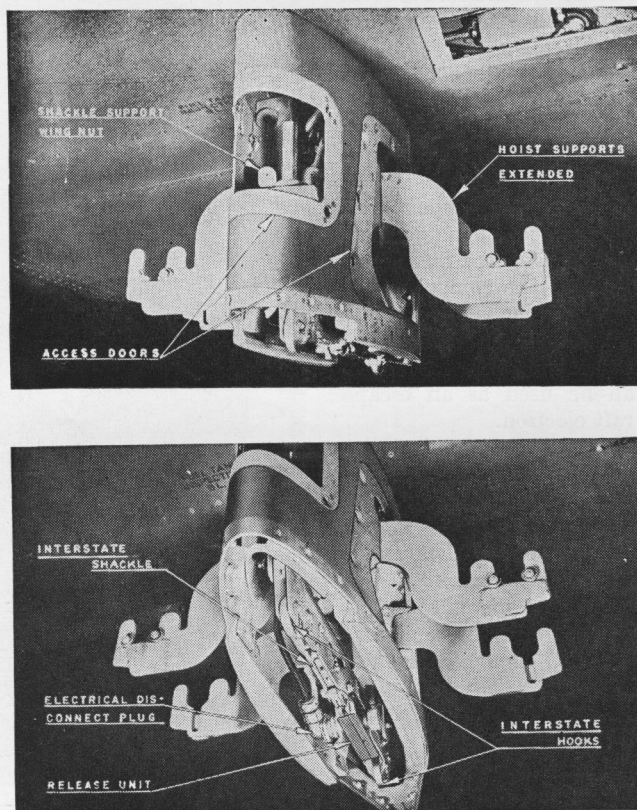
Two views of the bomb or auxiliary fuel tank shackles, with front access doors removed. Located on each side of the fuselage inboard of the engines, these units support tanks which have given the P-38's range enough to be flown from the United States to England, from there to Africa and, consistently, as escort fighters covering heavy bombers on long-range attacks on Germany. Lightnings now carry two 2,000-lb bombs.
